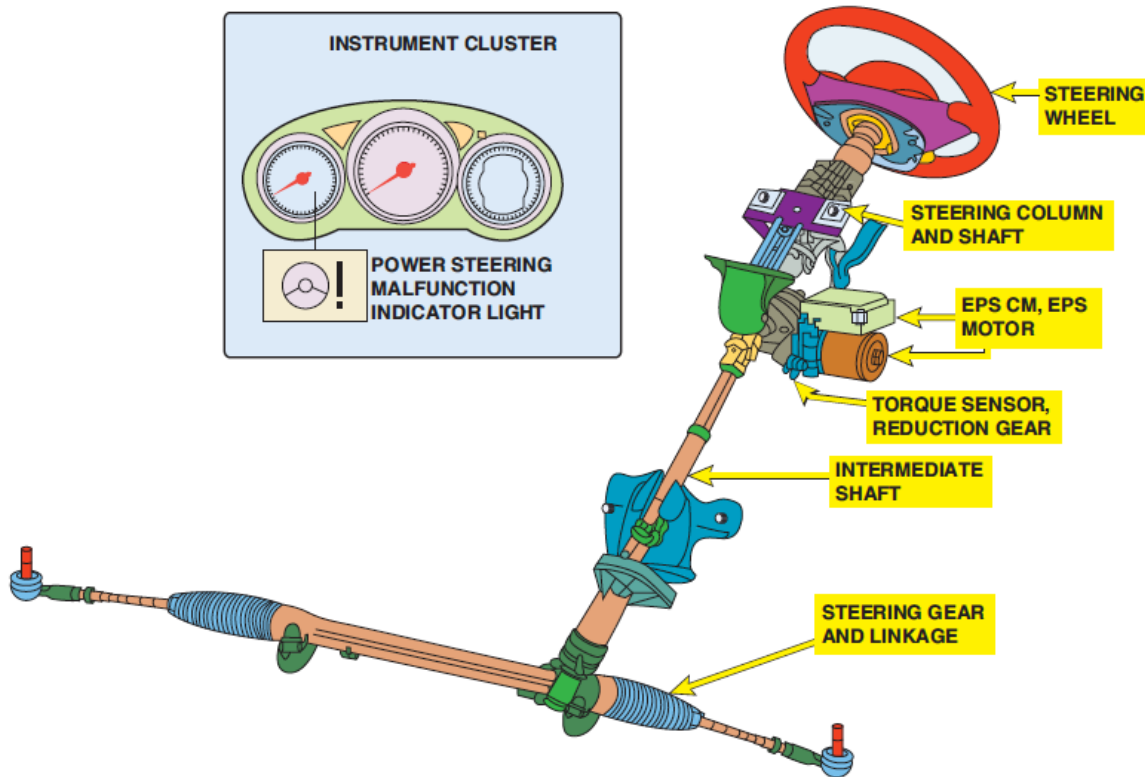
A typical column-mounted electric power steering (EPS) system showing the location of the major components involved including the dash warning light symbol.
